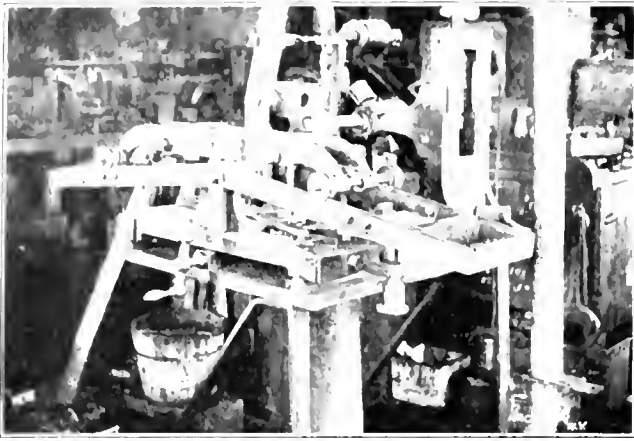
Grinding Link-blocks on the Machine shown in Fig. 30
